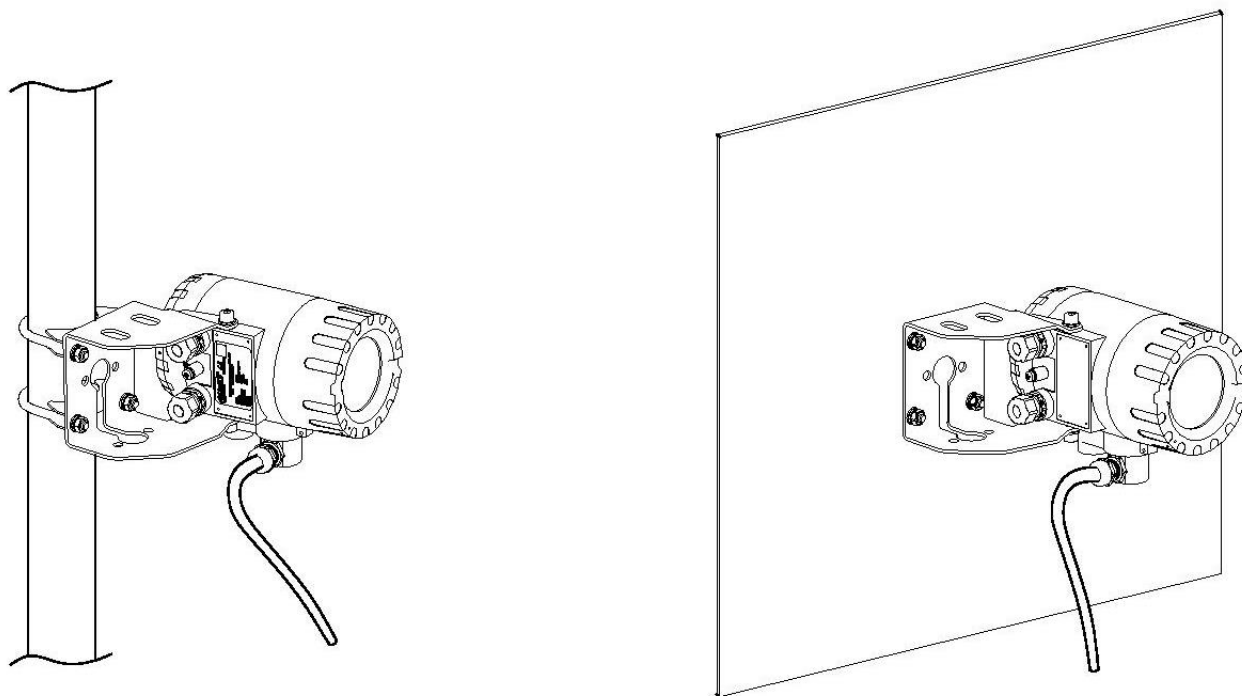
Assembly of the flow meter PEM-1000NW – examples
